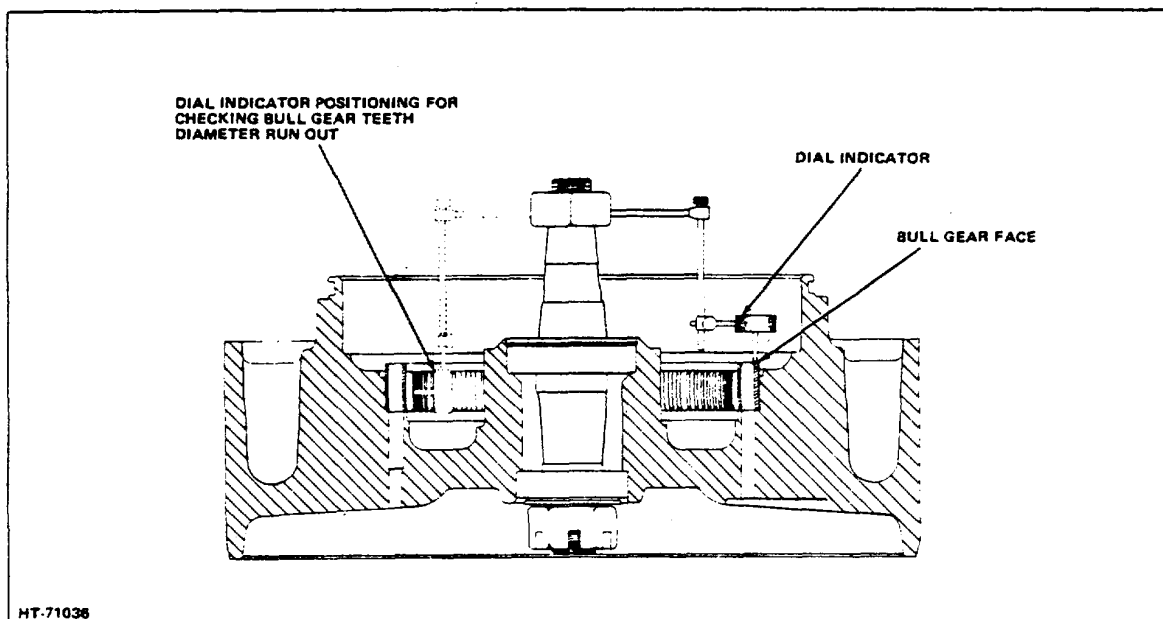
Checking Bull Gear Face and Teeth Run Out
